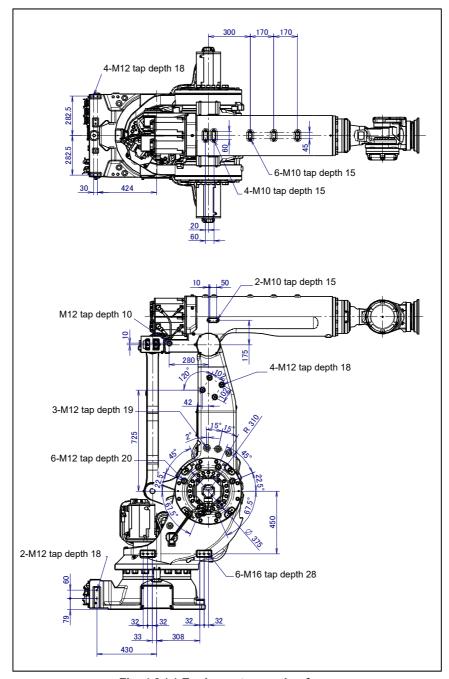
(e) Equipment mounting faces (M-900*i*B/280 (1/2))
